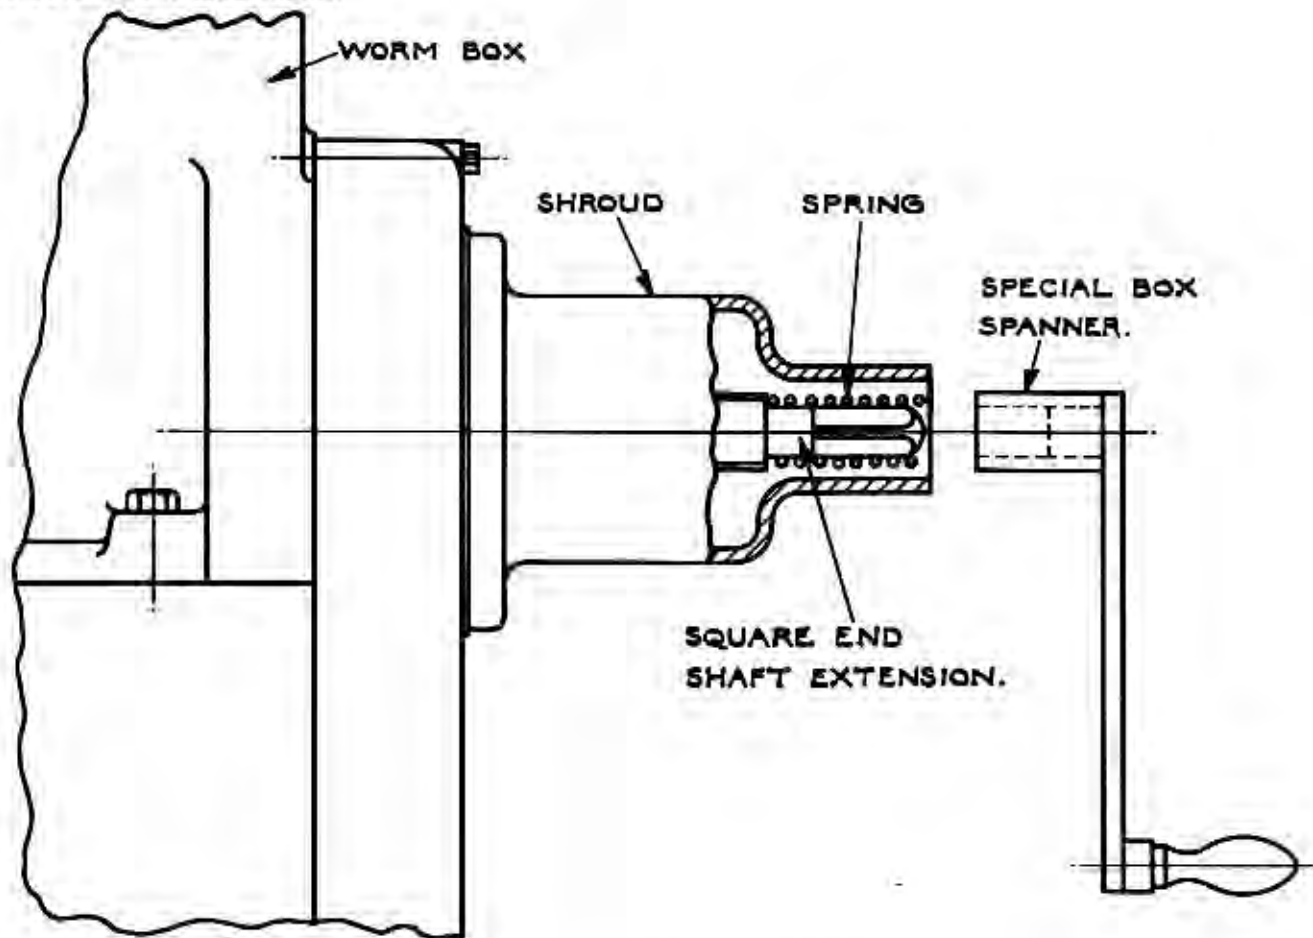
METHOD OF HAND TRAVERSING FEED CHAIN.
